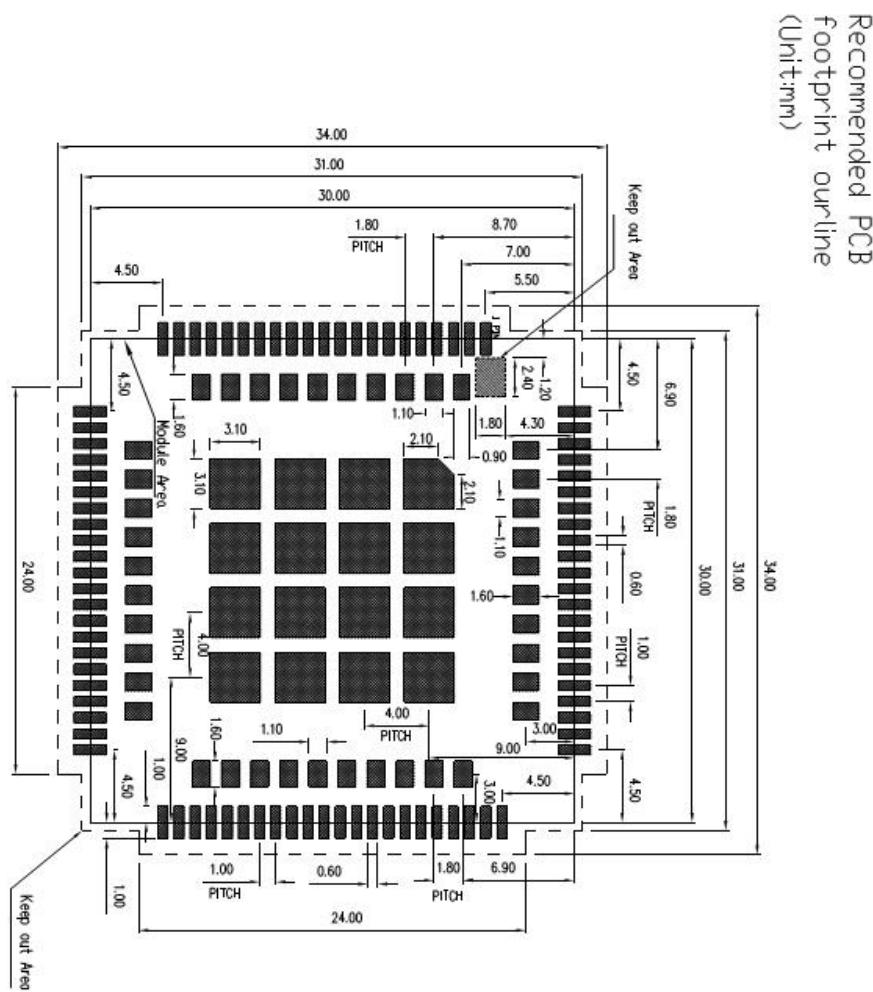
Recommend PCB footprint Dimension (Unit: mm)
